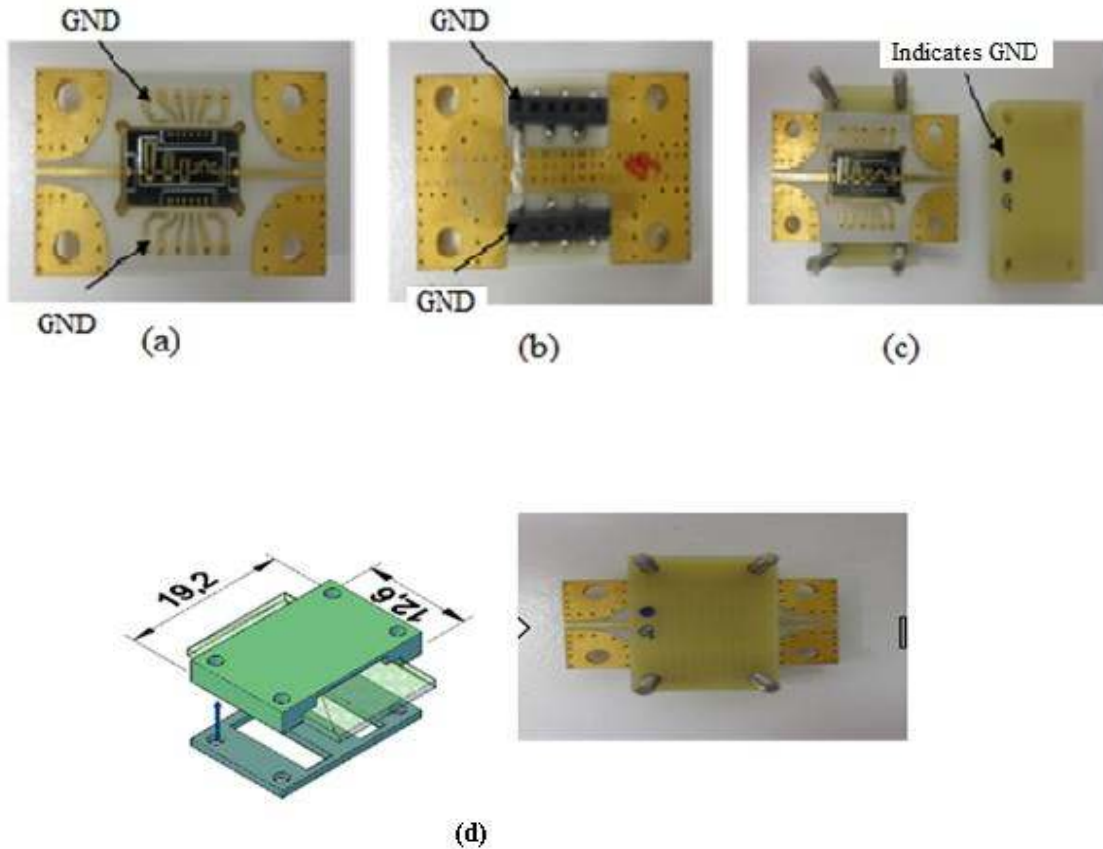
(a) and (b) dc interconnections along with die, (c) FR4 cap and (d) final view after assembly.
